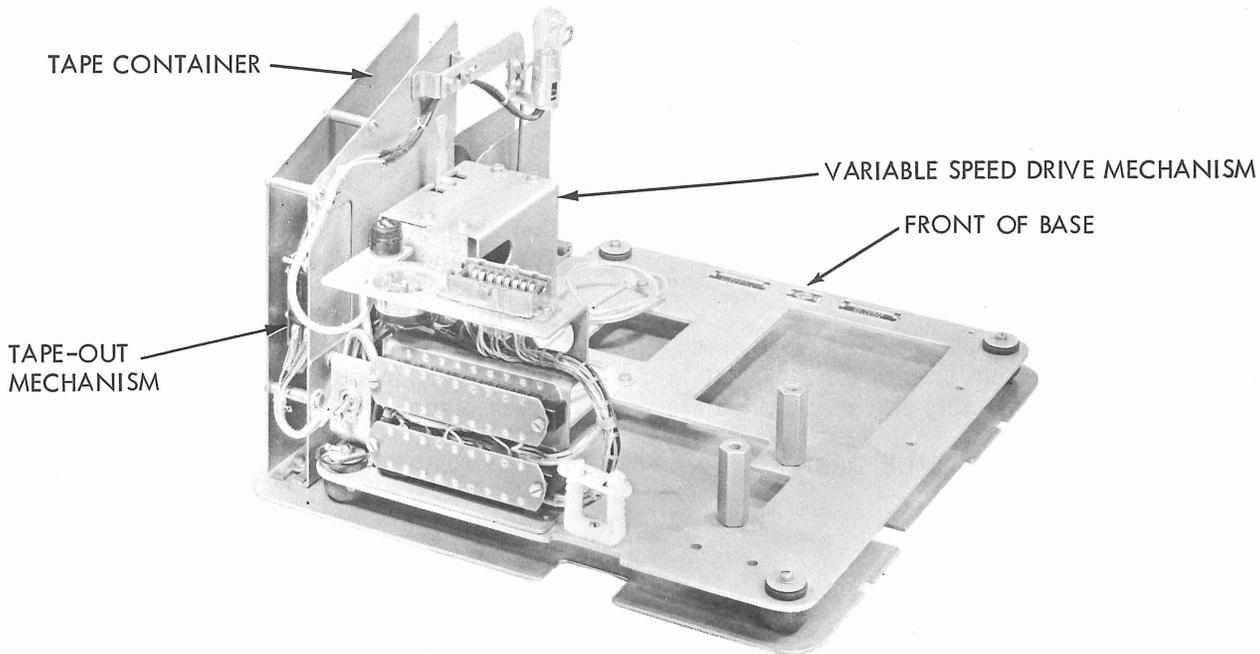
28 Receive-Only Reperforator Base (Rear View)
